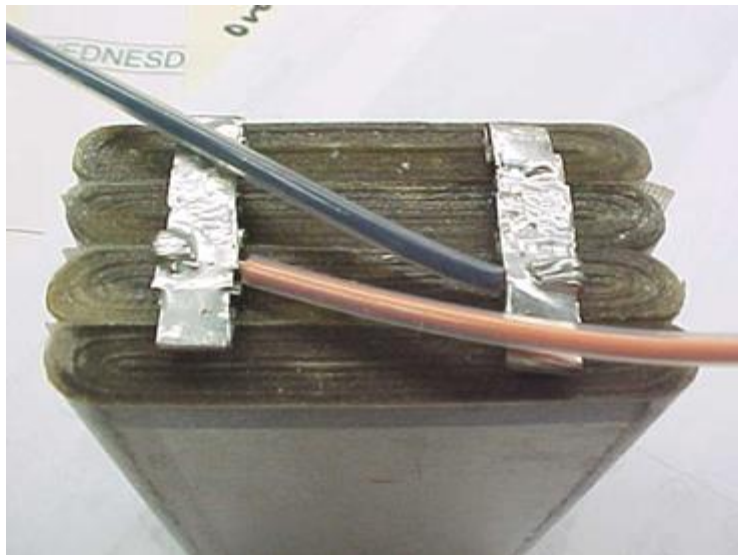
Assembly of 4 sections, electrical connection tabs soldered and lead wires attached [2]
